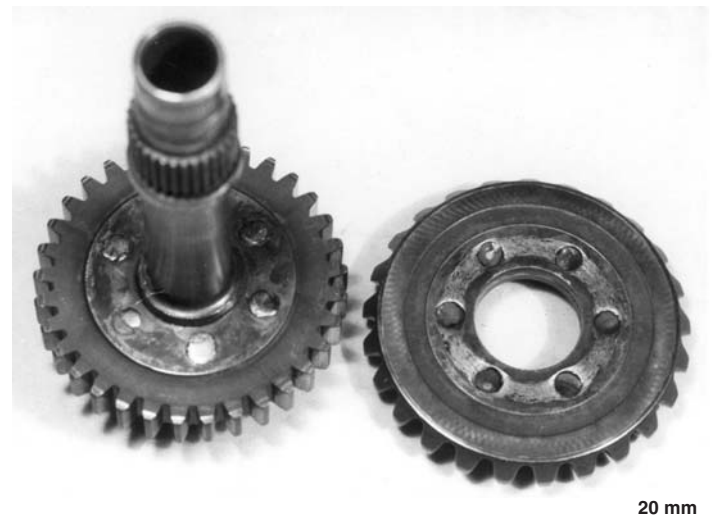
Bevel and spur gears with the failed dowel bolts
